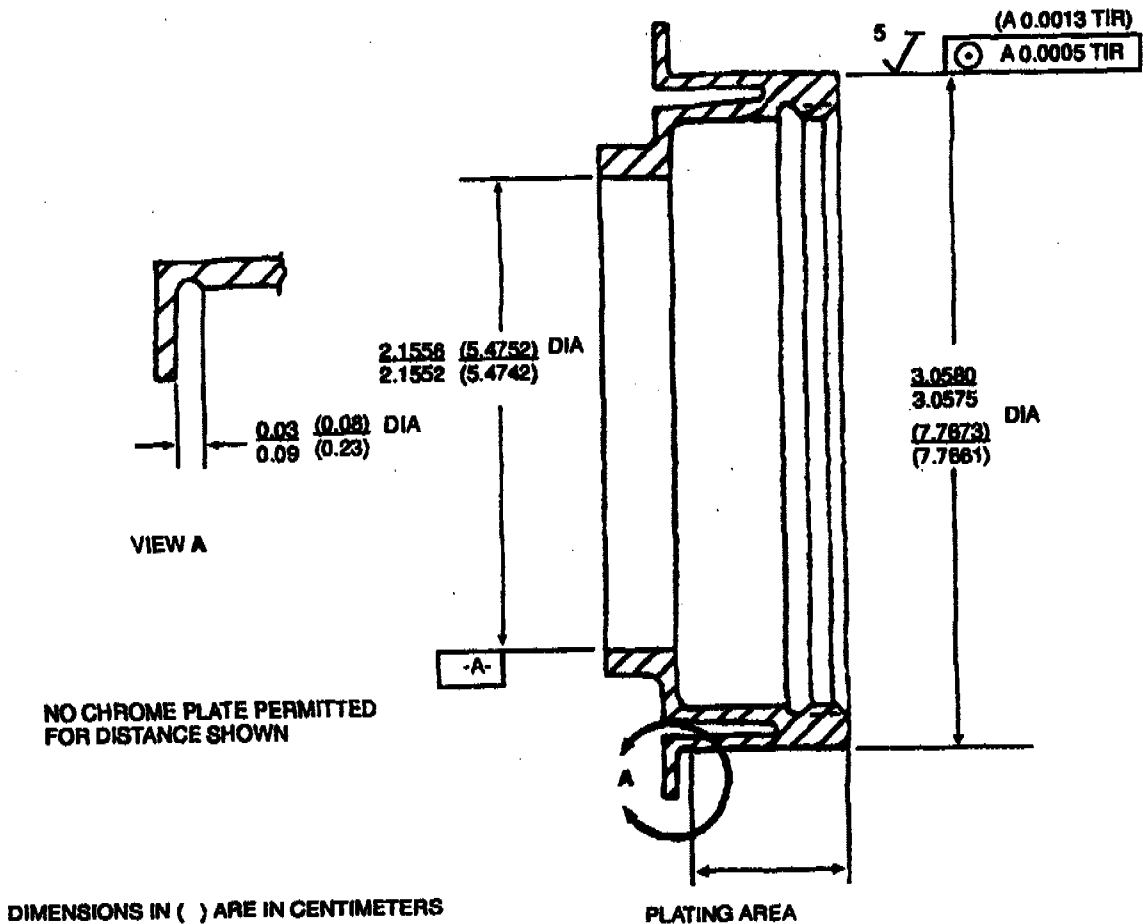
Rear Compressor Bearing Oil Ring - Plating Area.
